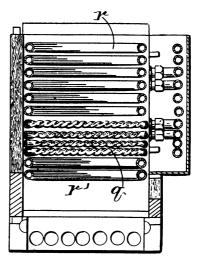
Serpollet system. Vertical section of boiler or steam generator.
